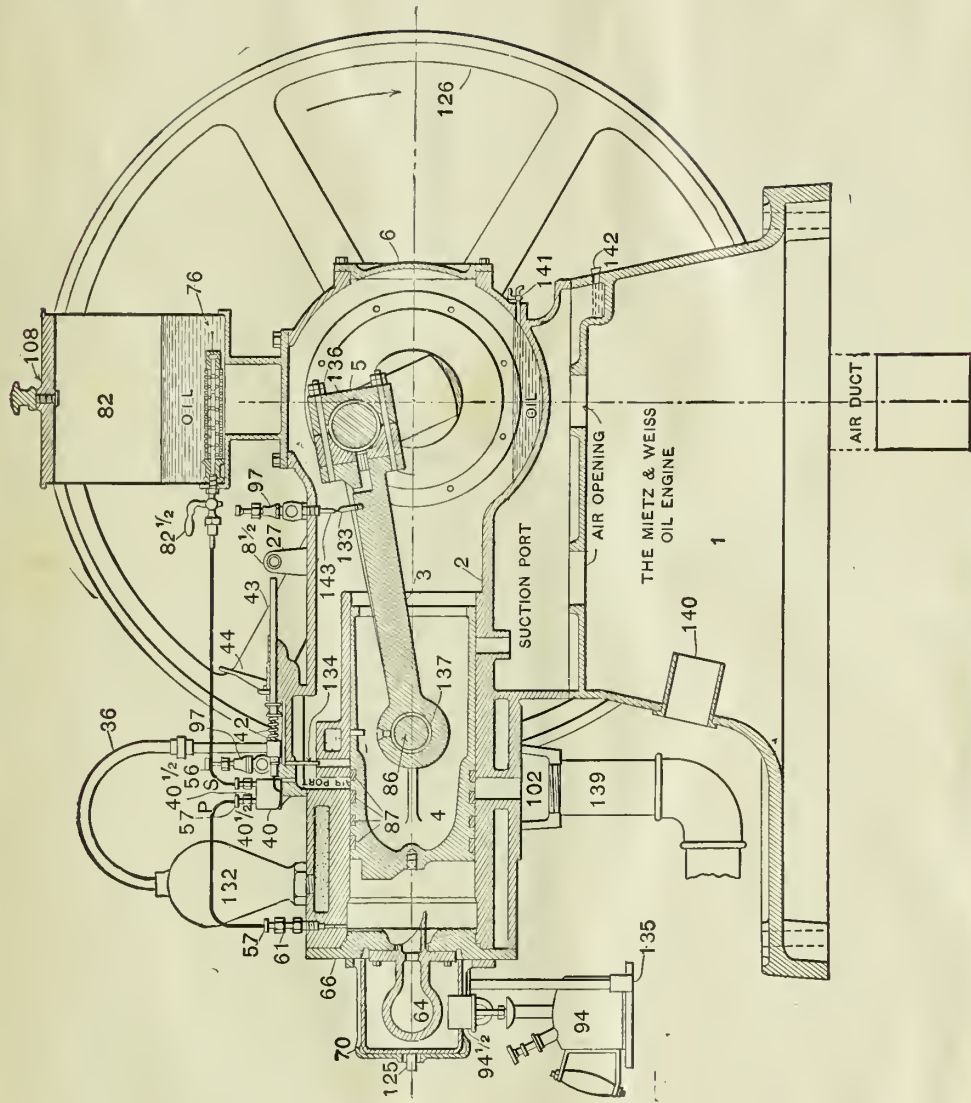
Section of the Mietz & Weiss Oil Engine.
